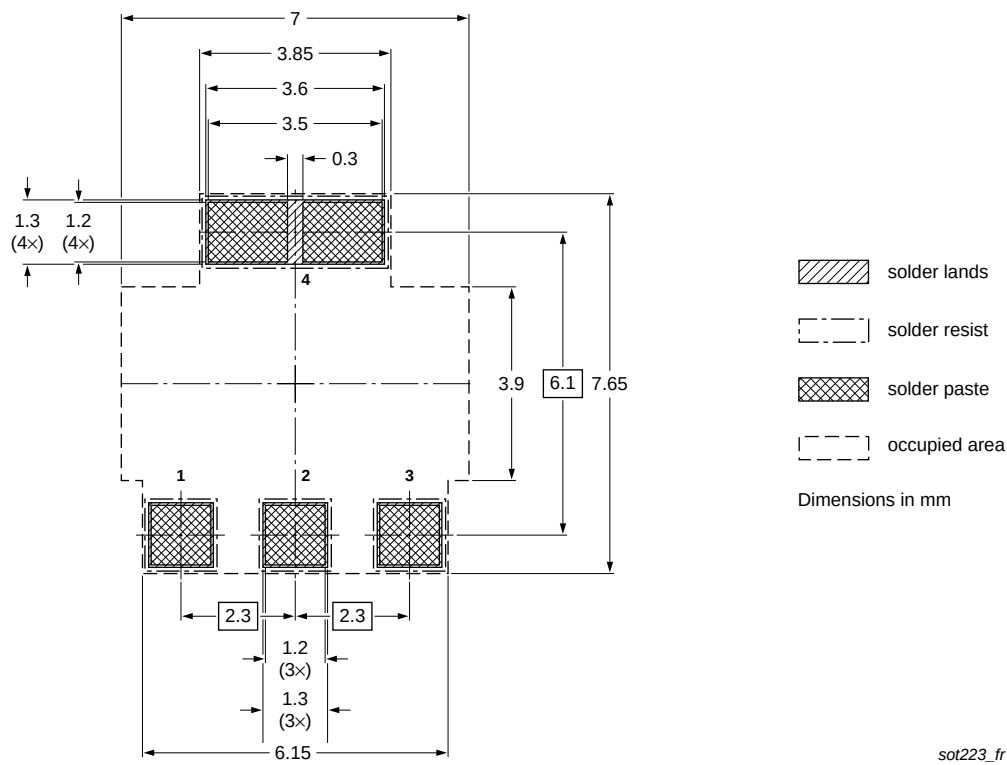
Reflow soldering footprint for SOT223 (SC-73)
